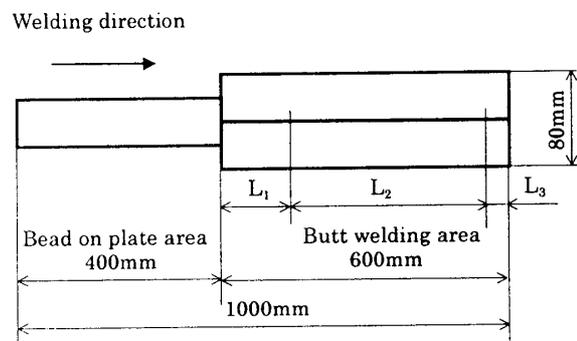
Thin aluminium plate joint details for butt welding.
